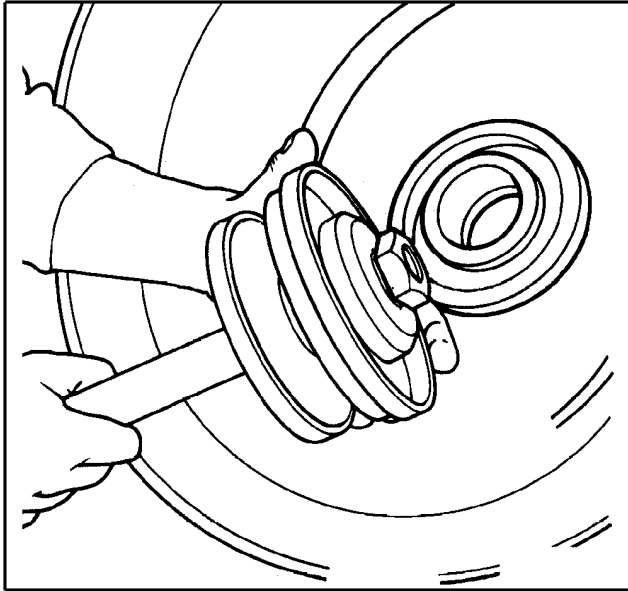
Installation of Unitized Seal Onto Tool Adapter
